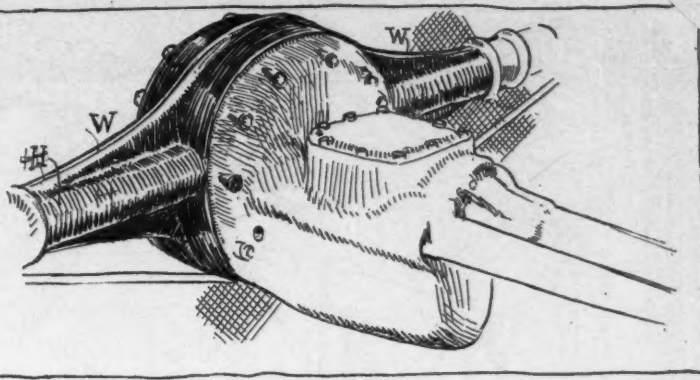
THE PRESENT MARMON GEARSET DESIGN
